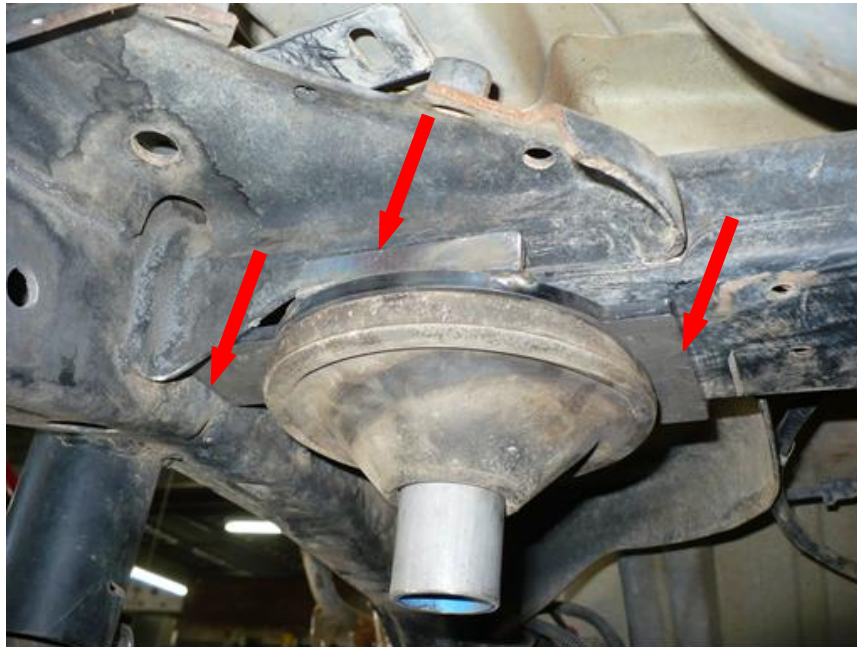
Coil Mount Locating Tabs Held by Coil Retainer
